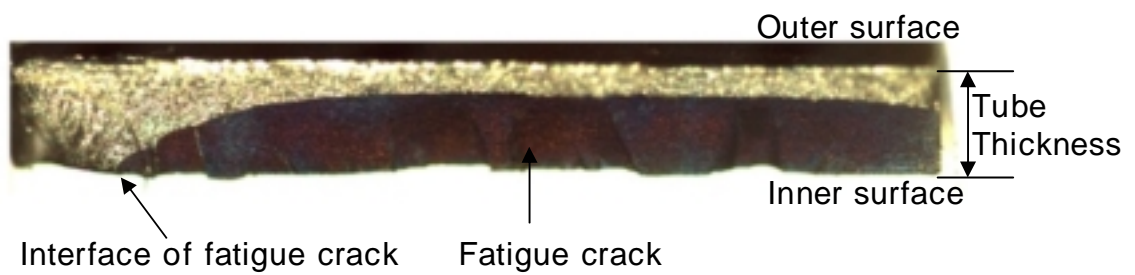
Cross-section of pre-crack showing the depth of fatigue crack (70% of total tube thickness).
